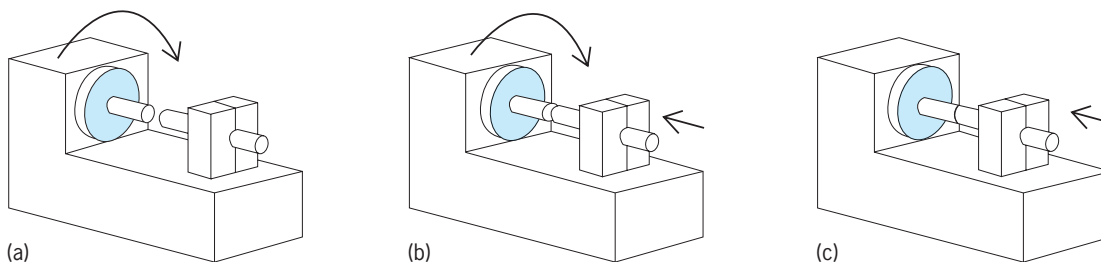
Work sequence of inertia welding process. (a) Acceleration of flywheel and chuck-holding workpiece to preset speed. (b) At speed, drive is cut and workpieces are thrust together. (c) Workpieces bond together to stop flywheel rotation; weld is complete.
